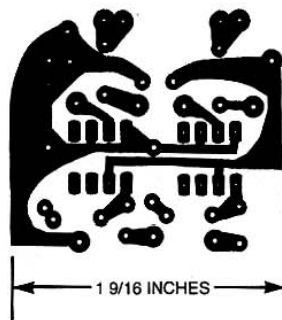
The author's prototype of the circuit was assembled on a printed-circuit board, measuring 1  $\frac{9}{16}$  by 1  $\frac{7}{16}$  inches. A full-size template of the author's board is shown here.
